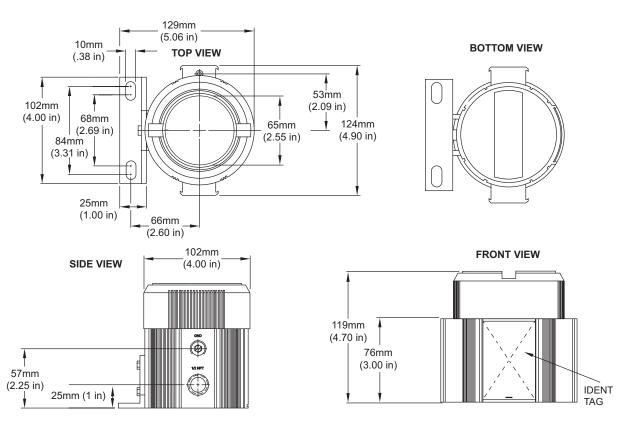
Dimensions for the LRX in the BH explosion-proof enclosure
